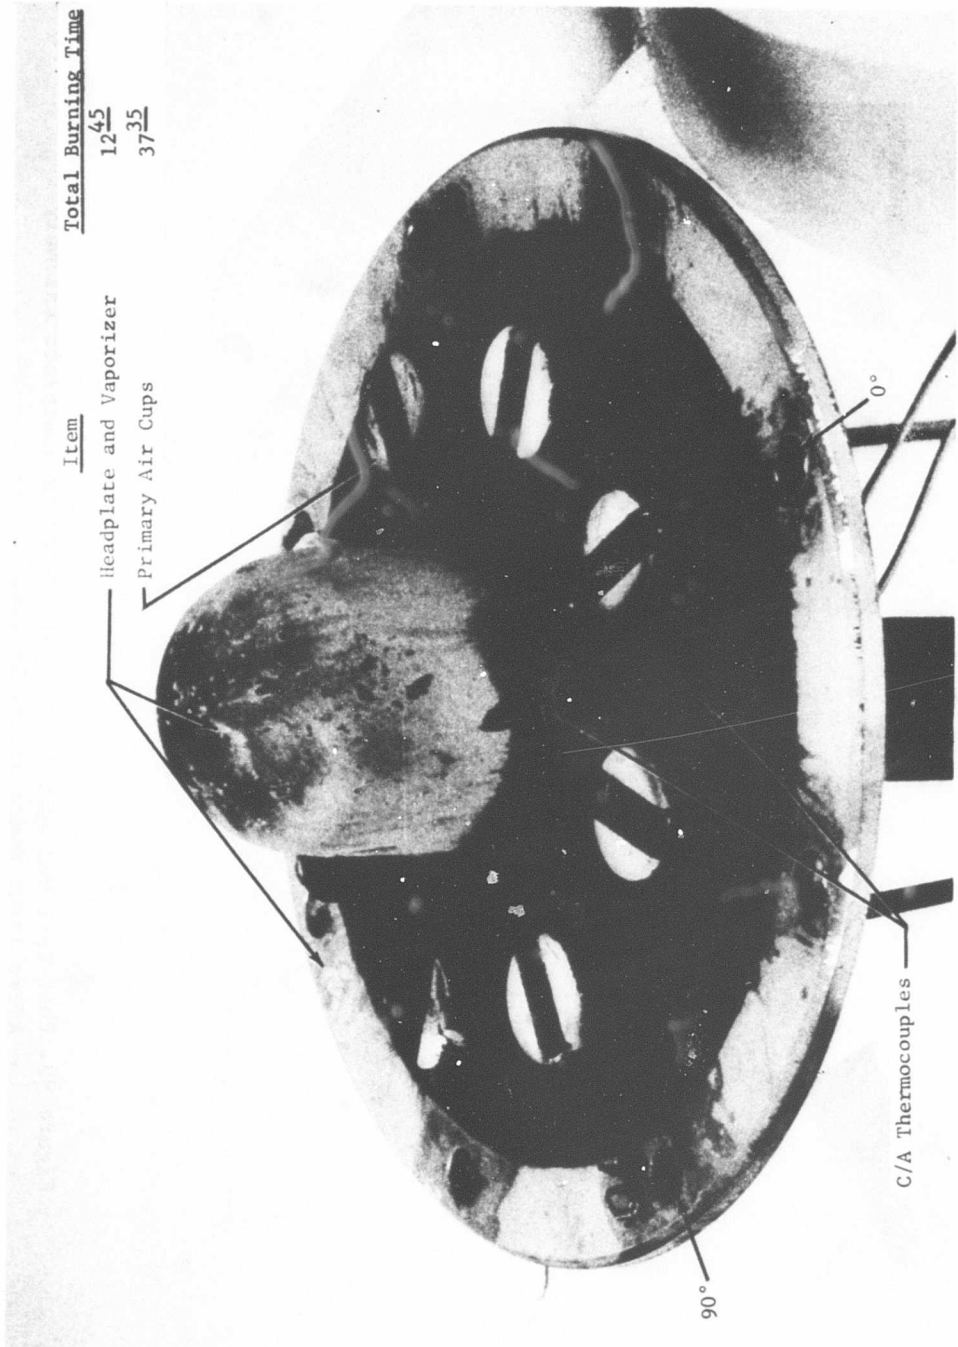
Post-Test Photograph of Mushroom Vaporizer Headplate Assembly After 12:45 Hours of Hot Testing.
